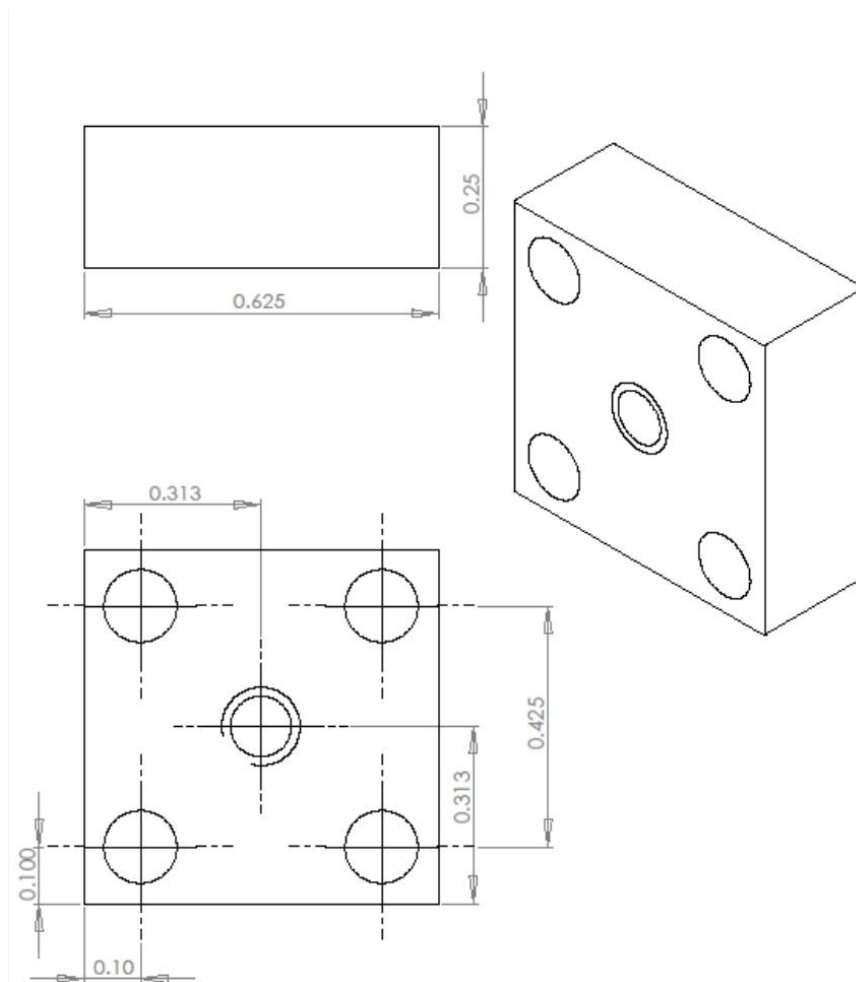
Schematic for top of C-F Fixture. Dimensions in inches.
